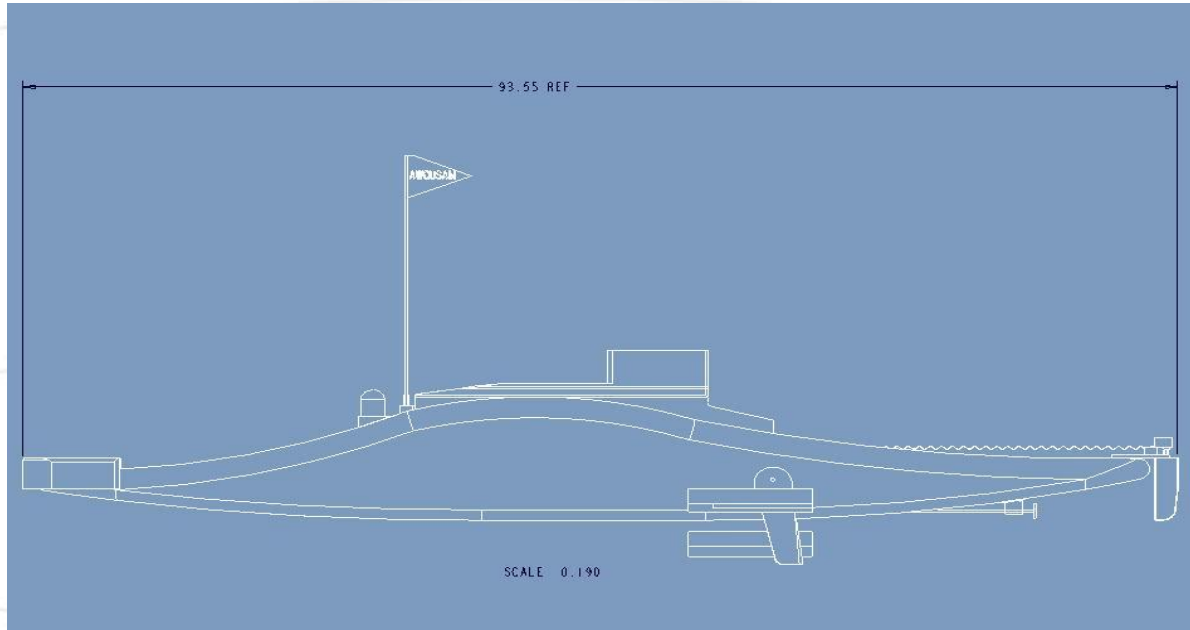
Wire Frame Side View with Dimension (7.8 feet)
